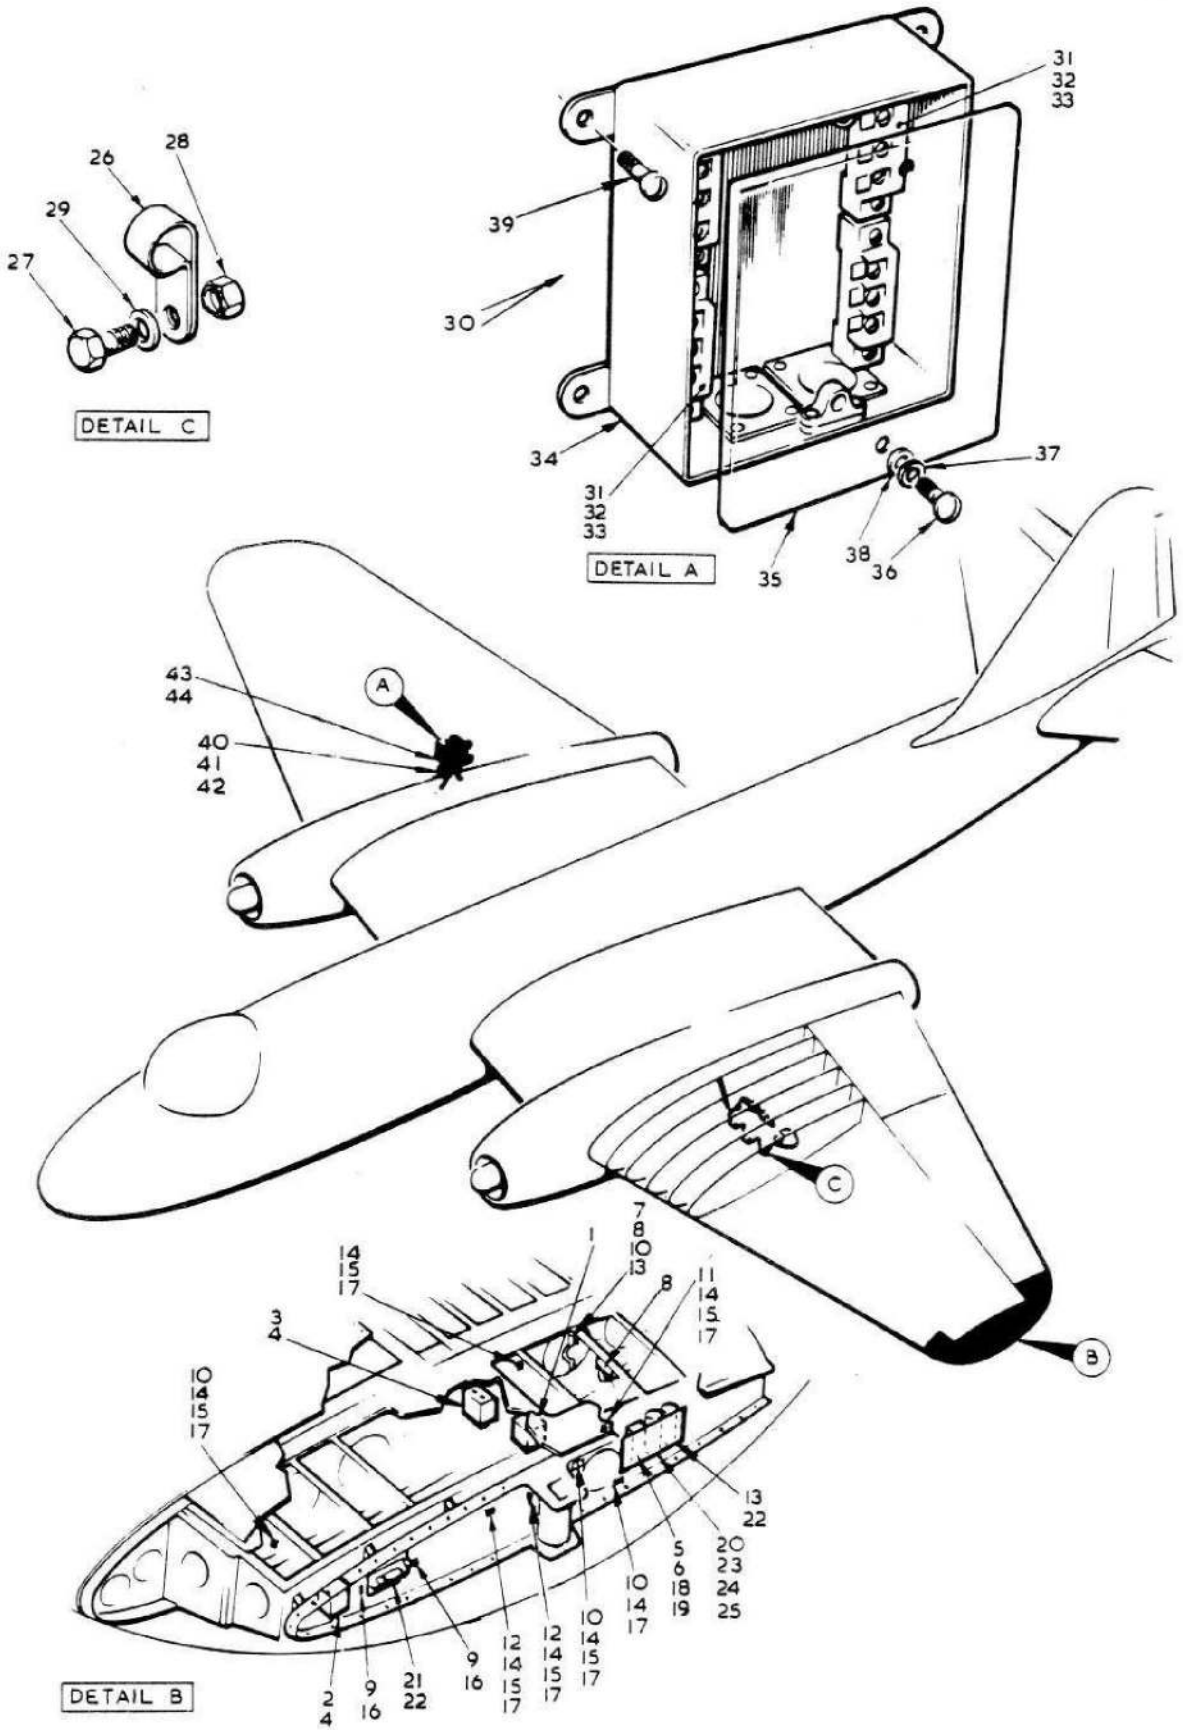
ELECTRICAL EQUIPMENT IN WINGS
